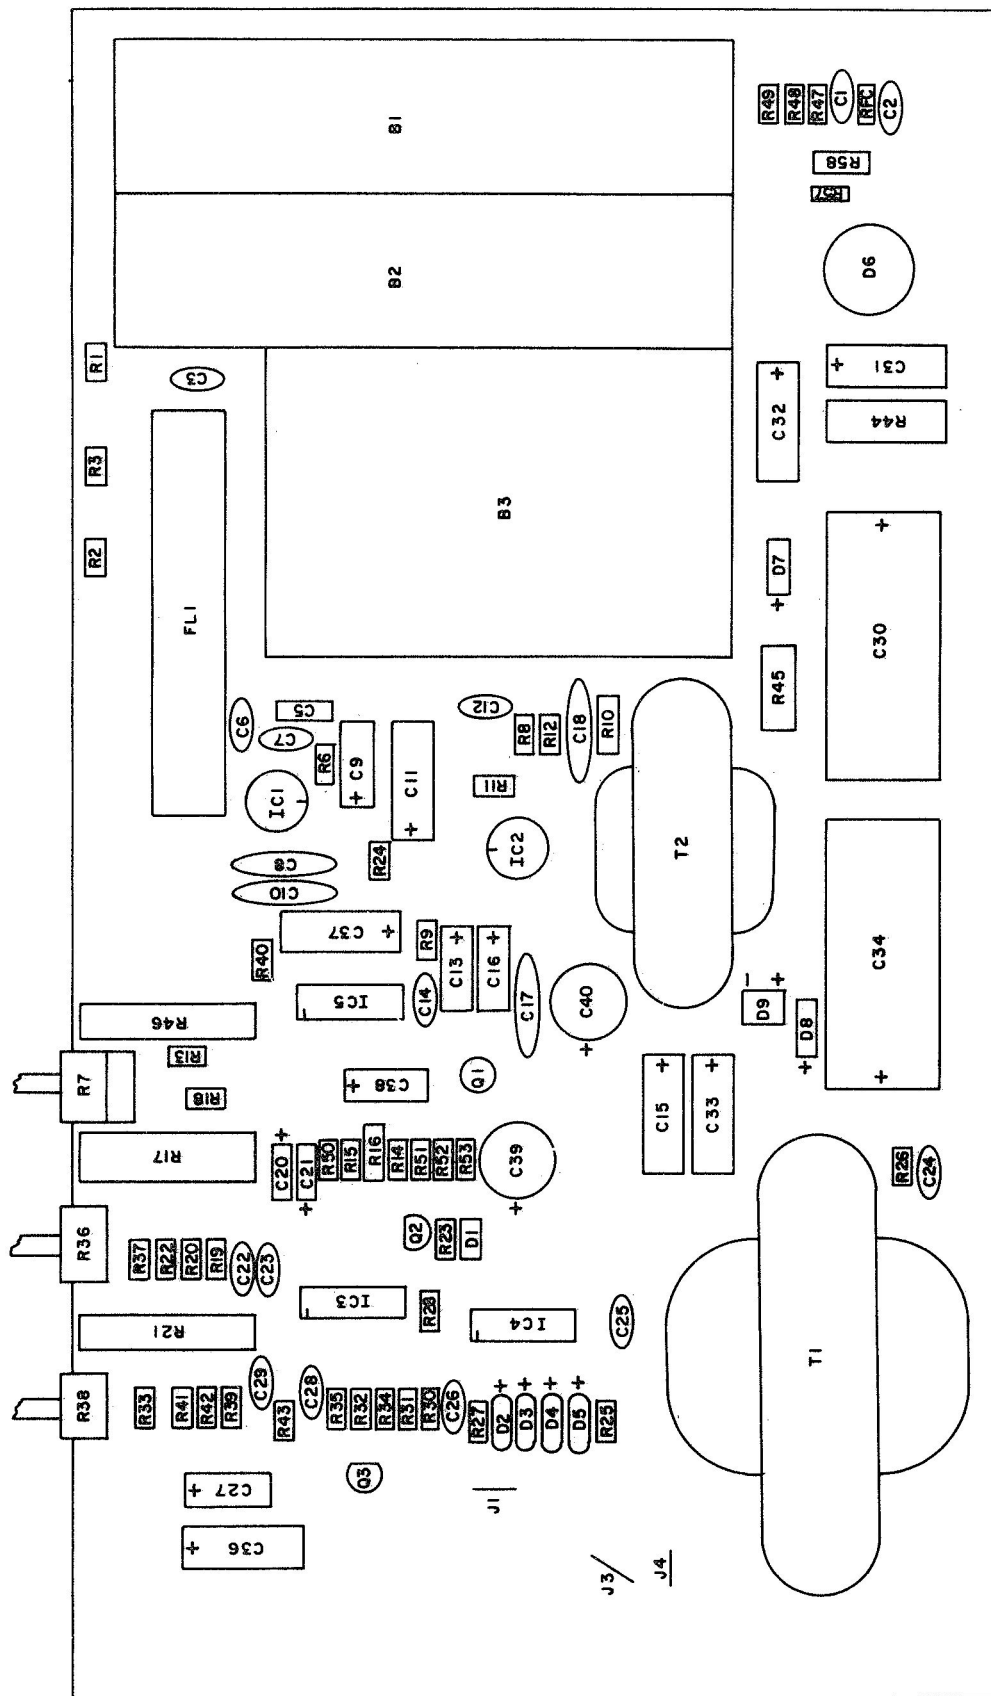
PRINTED-CIRCUIT PARTS PLACEMENT.
